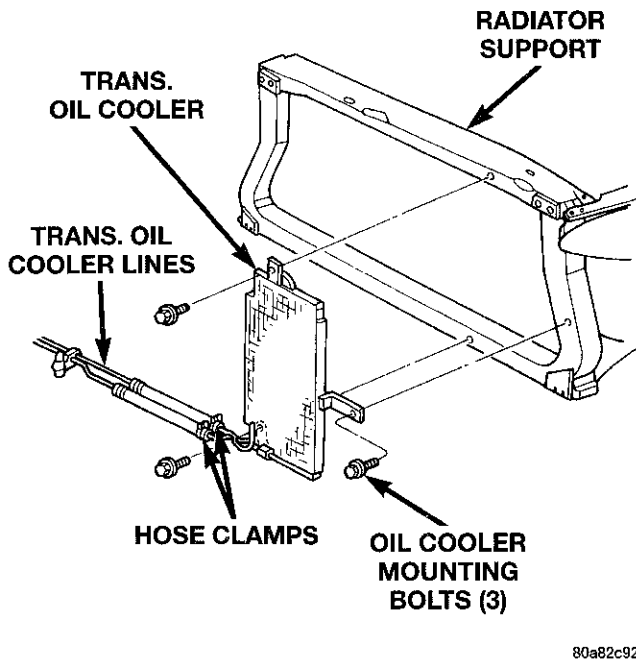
Auxiliary Transmission Oil Cooler—8.0L Engine
